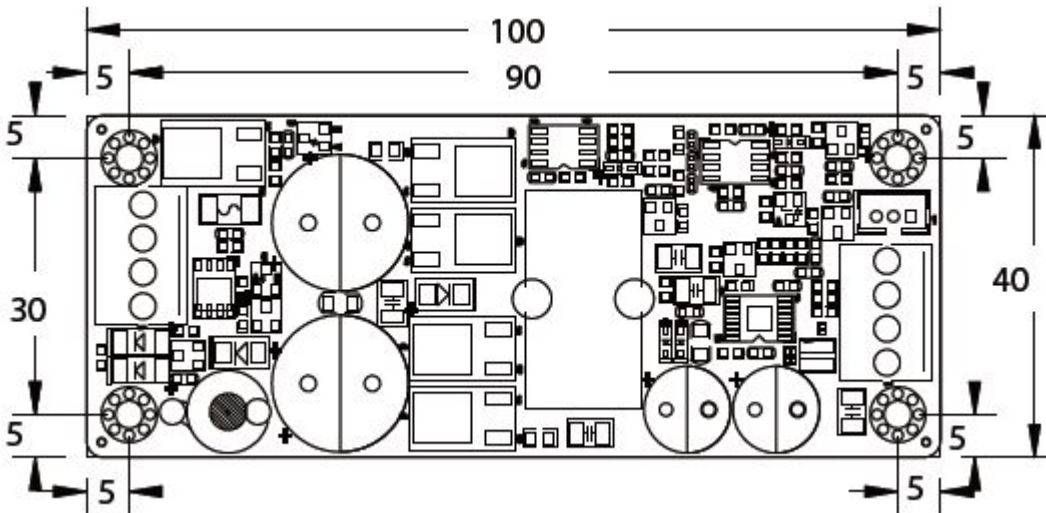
IDD-241100/481100 Dimension Drawing (measurement units: millimeter)
